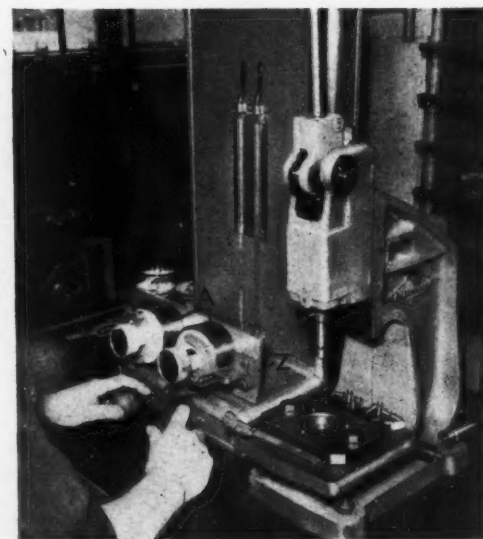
This special-purpose machine, which is tended by a deaf-and-dumb operator, is employed for drilling the cross pin holes in the push rod end fittings, in a floor-to-floor time of 30 sec. each
